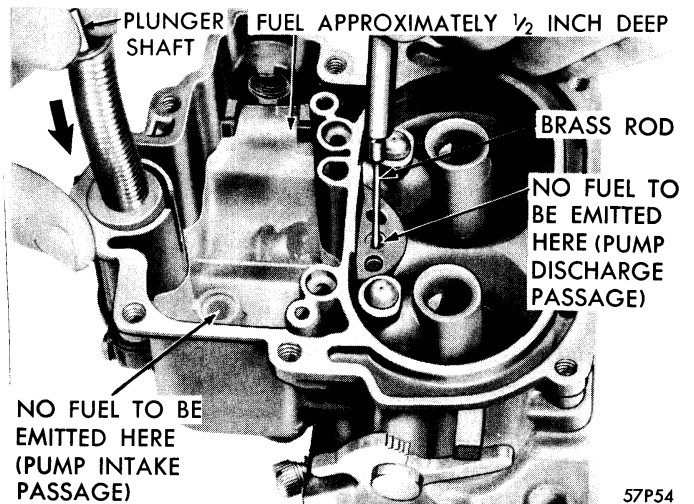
Testing Accelerator Pump Intake and Discharge Check Balls
